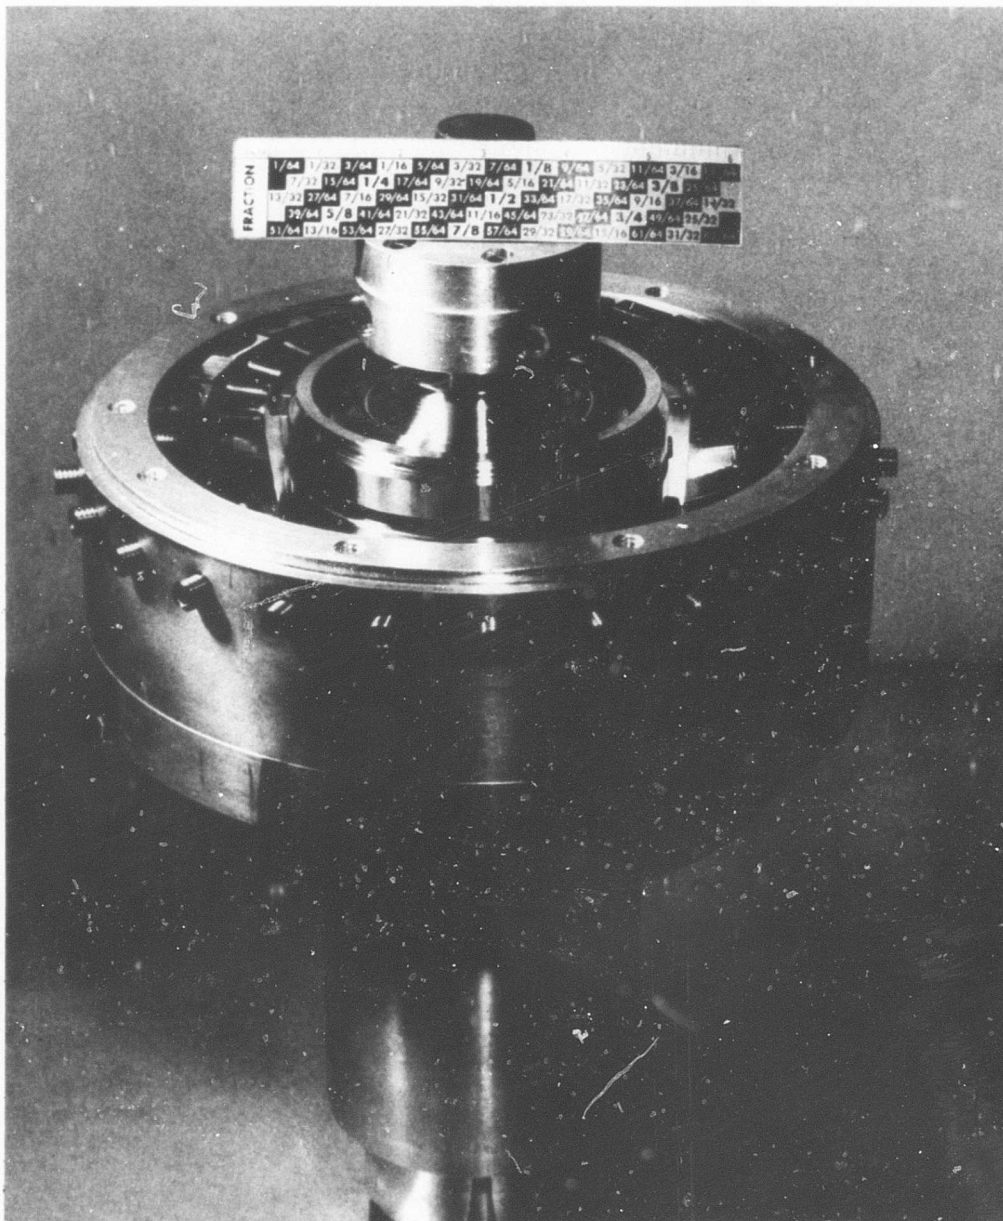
(a). Turbine Rotor Blade-To-Disc Weld Fixture - Original.
